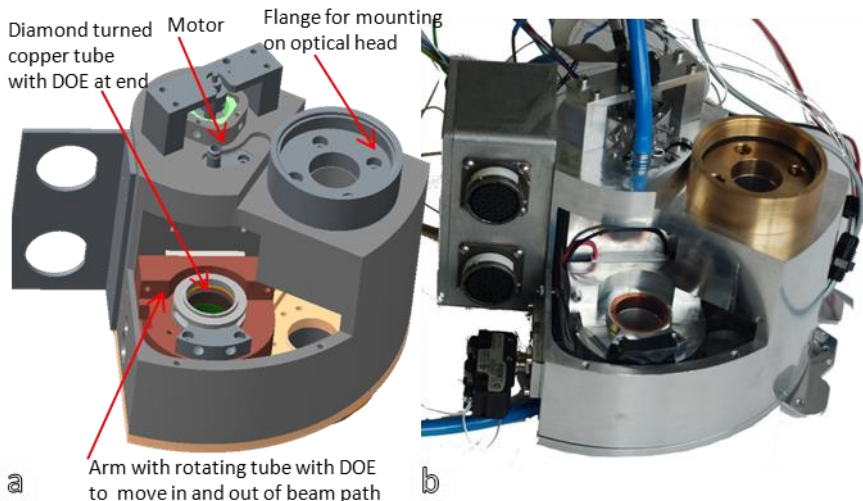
DOE rotator with some of the protective housing removed. Arm with DOE shown in “open position”. a) CAD image. b) Photo.
